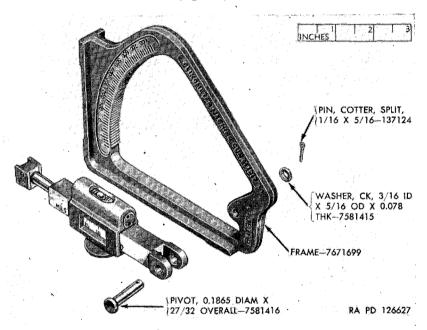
Sliding level assembly B271873 and radial arm group assembly 7199509 removed from frame.
